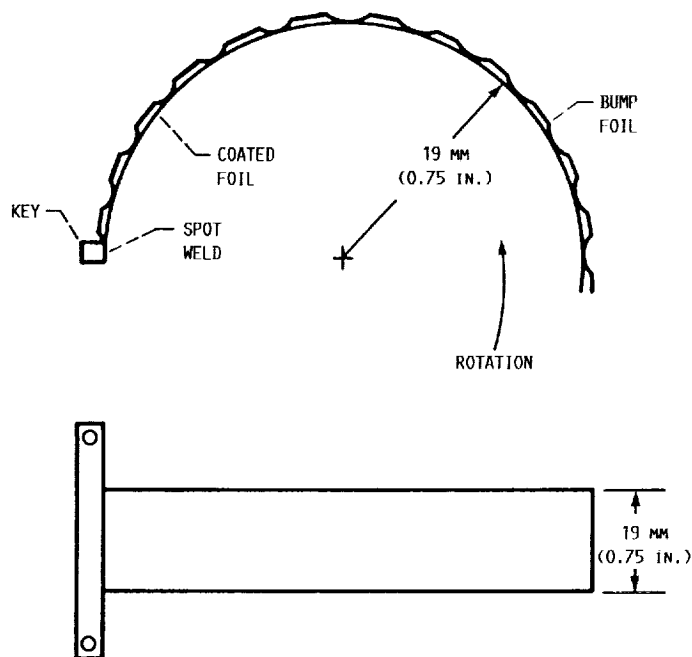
A. - COMPLIANT FOIL GAS BEARING ASSEMBLY.
